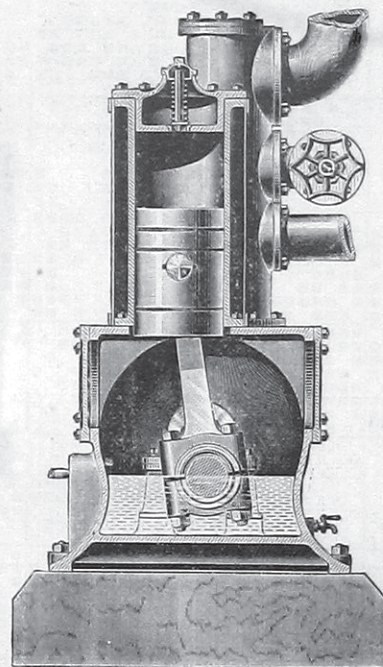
SECTION THROUGH H.P. CYLINDER.
